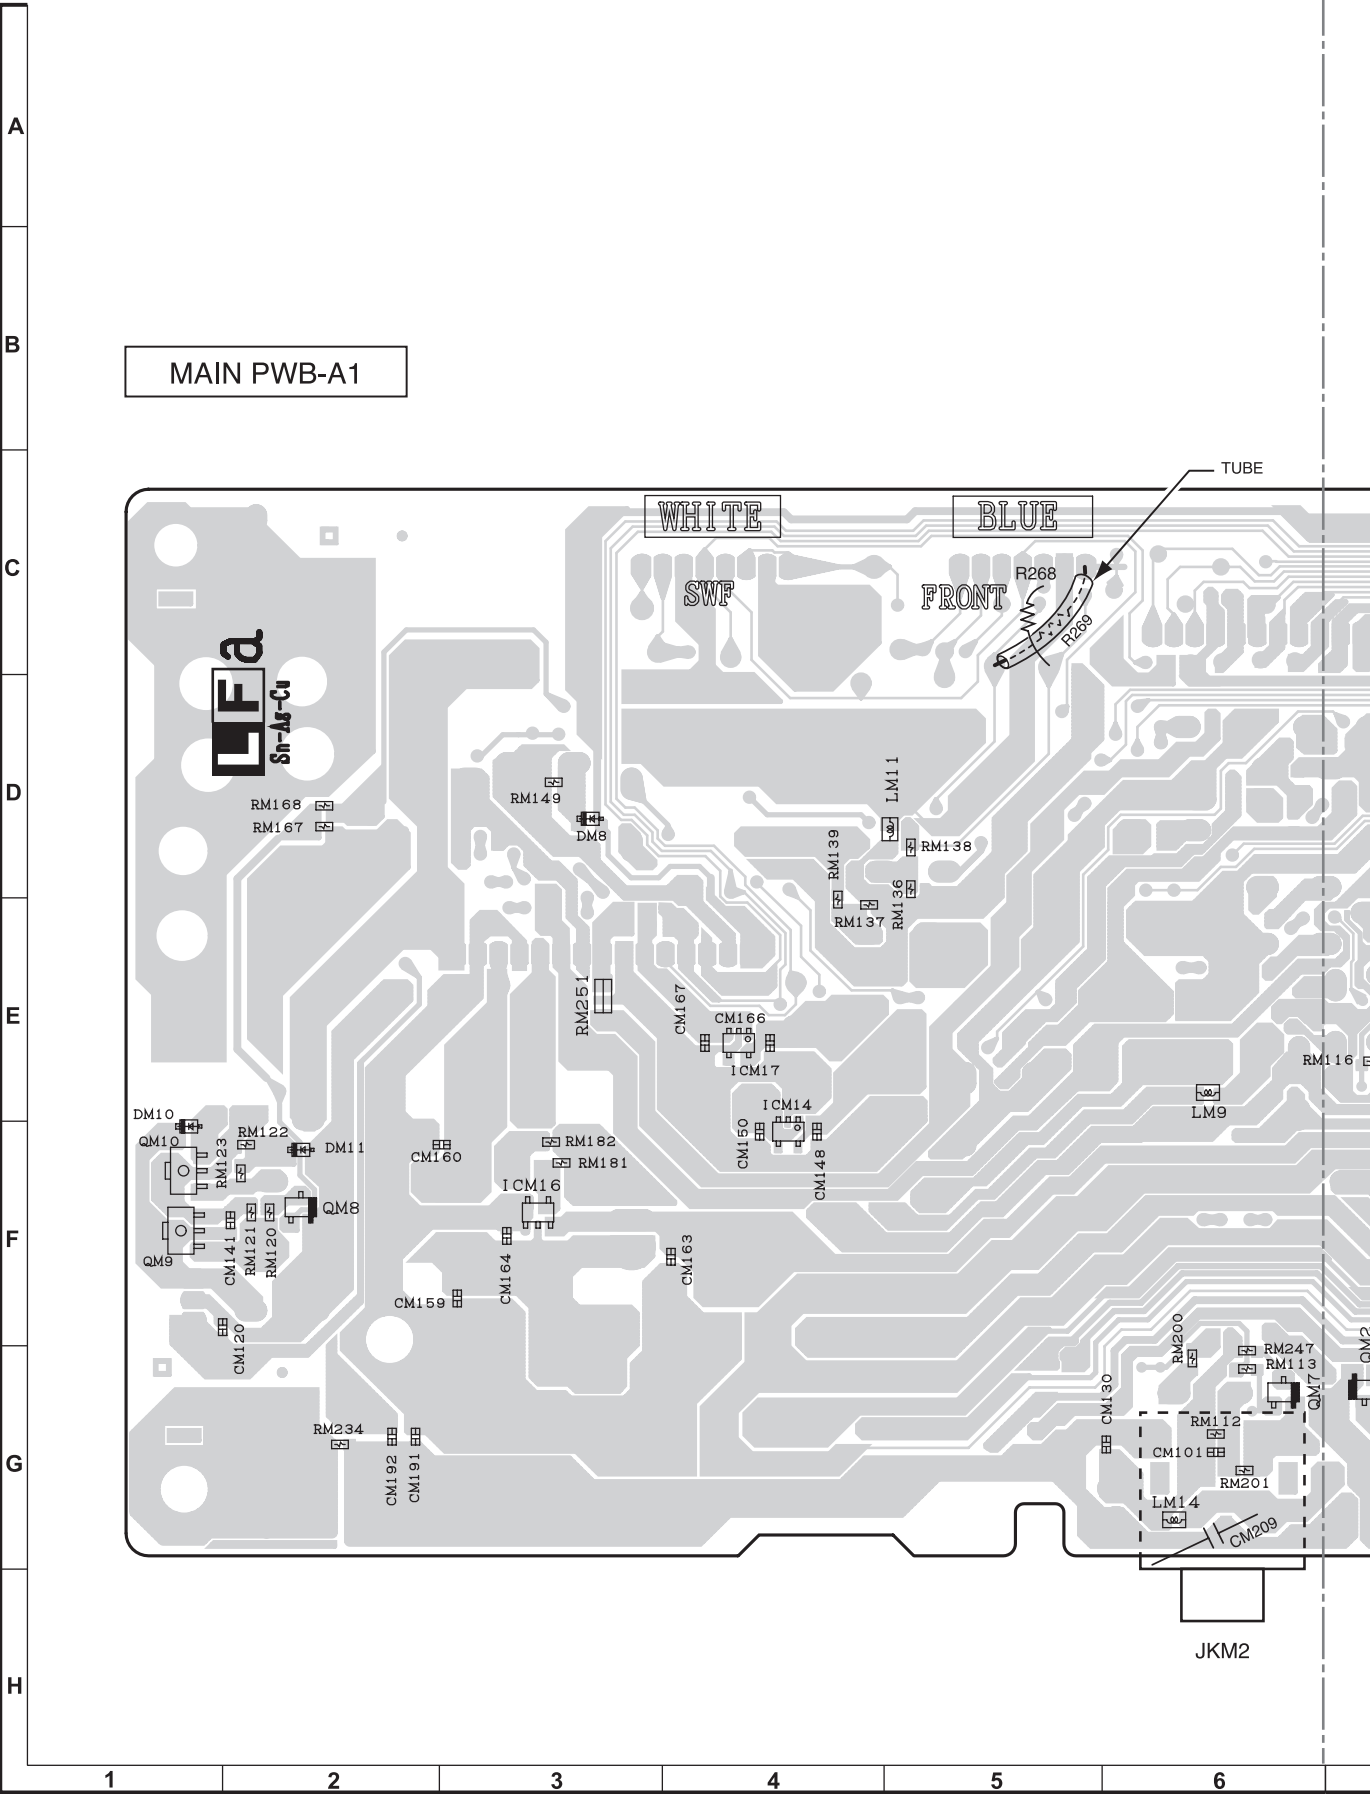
WIRING SIDE OF MAIN PWB (BOTTOM VIEW) (3/15)
